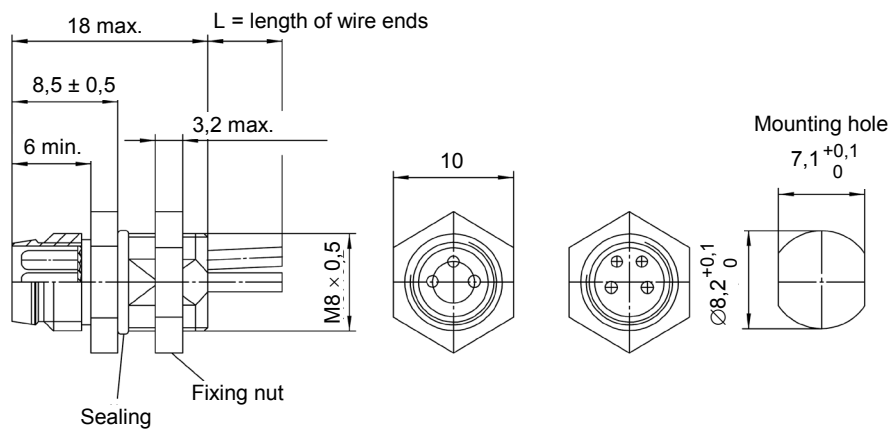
Fixed connector with wire ends, male contacts, single hole mounting
